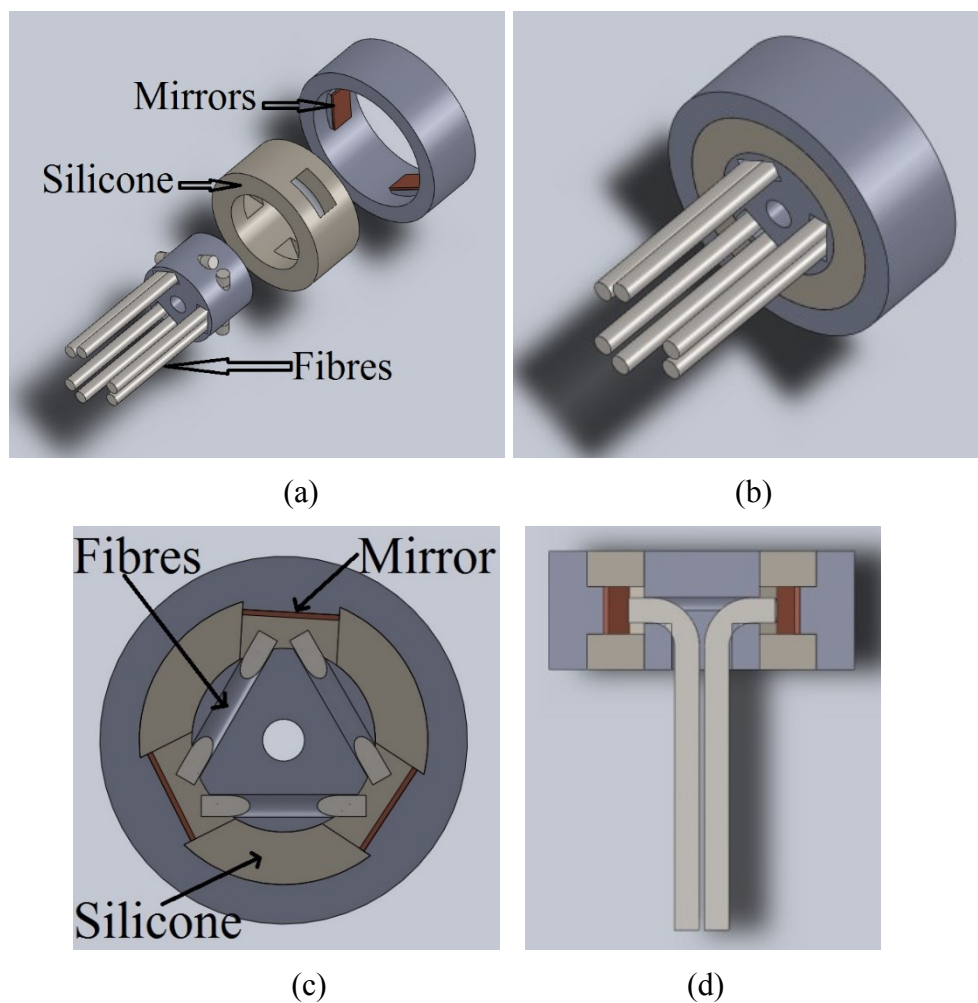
3D model of developed tactile sensor: (a) before assembly, (b) assembled, (c) top view, (d) side view.
